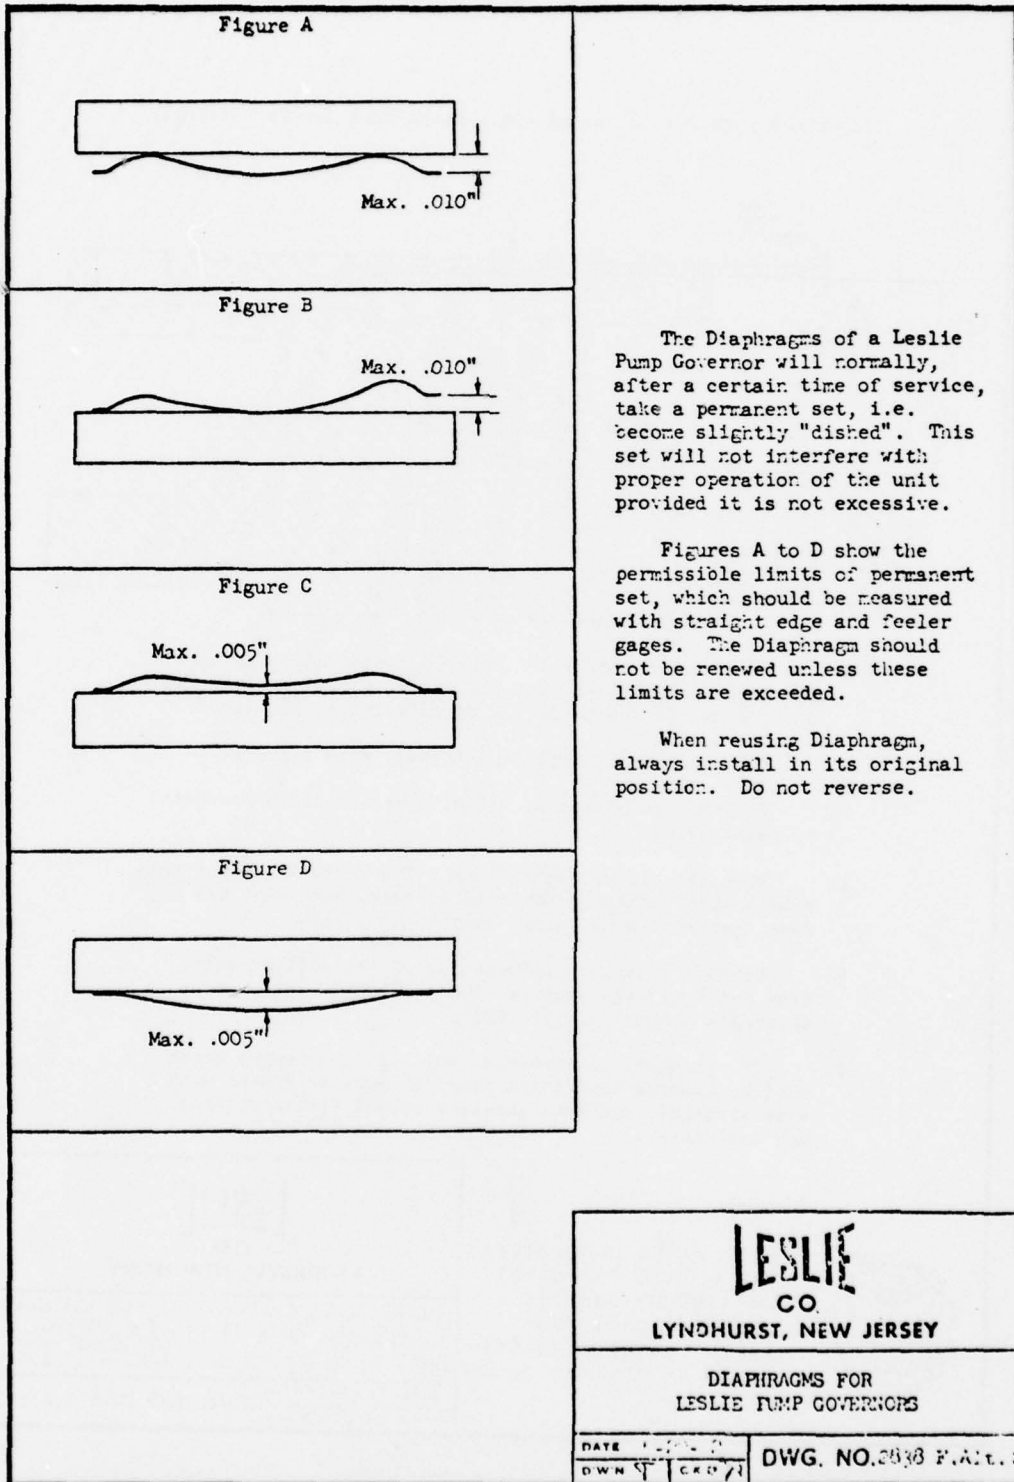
LESLIE COMPANY DRAWING NO. 2838 F, ALT. 1
